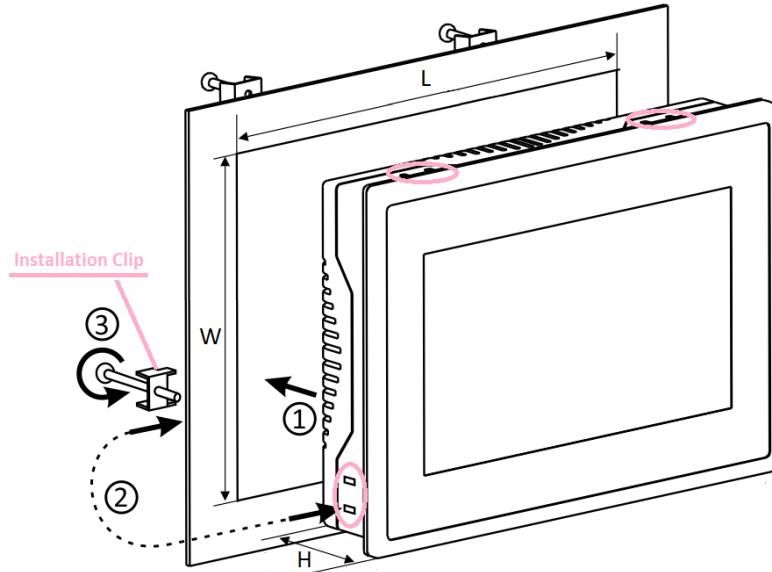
Mounting the Optional 7'' Touch-Screen HMI
